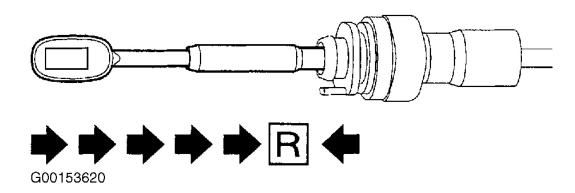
Placing Shift Cable In "R" Position Courtesy of AMERICAN HONDA MOTOR CO., INC.
